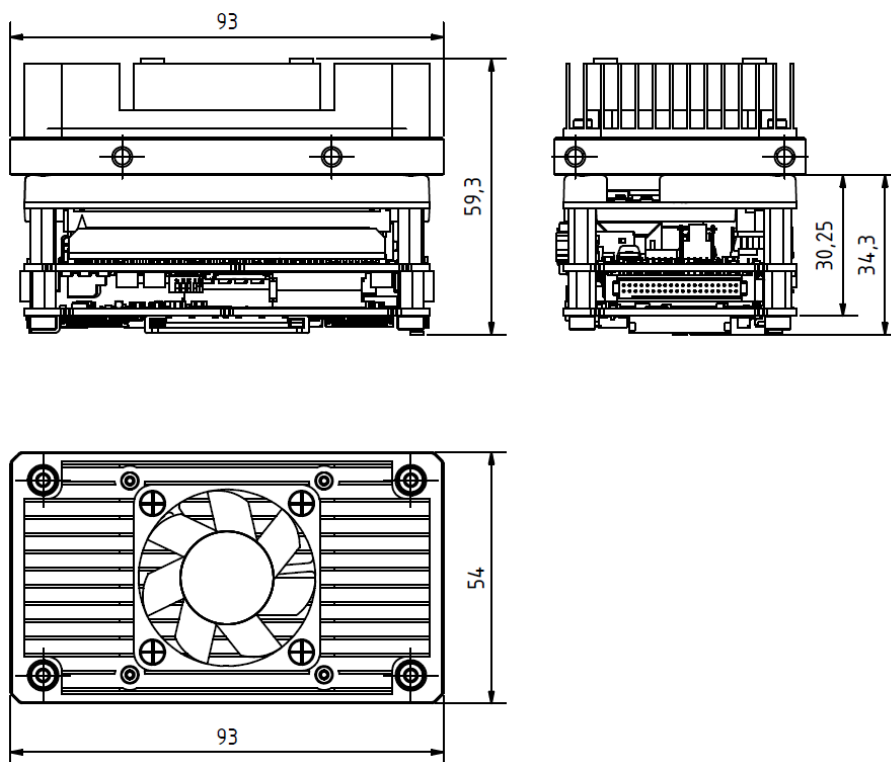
, dimensions XEC2-4P-X2G2 system with fan / heat sink
